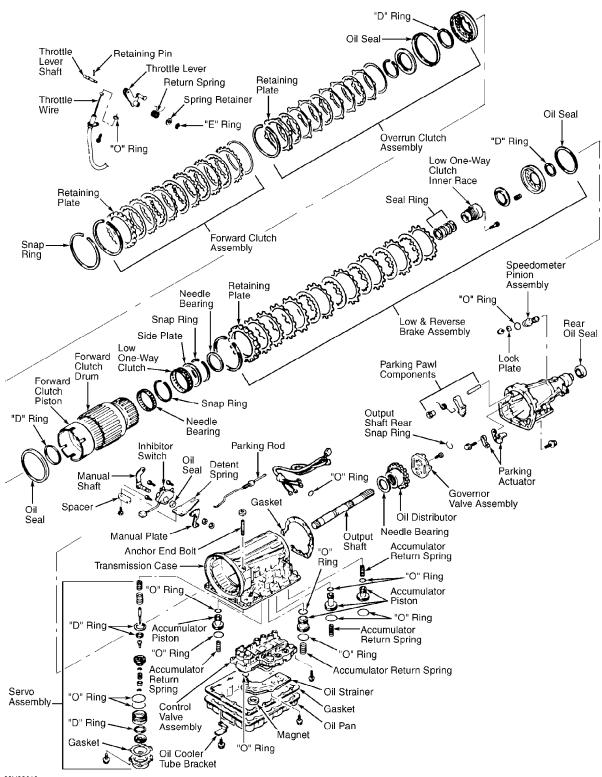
Exploded View Of A/T Case Components (RL4R01A) Courtesy of Nissan Motor Co., U.S.A.
